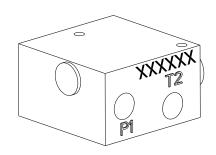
Flow Regulator Valve - Part Number Location XXXXXX
